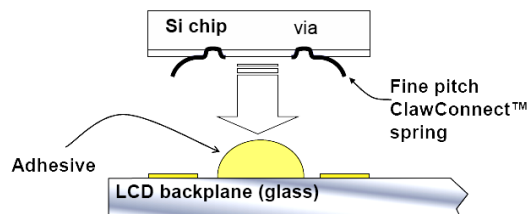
COG packaging method using integrated springs and liquid adhesive.
